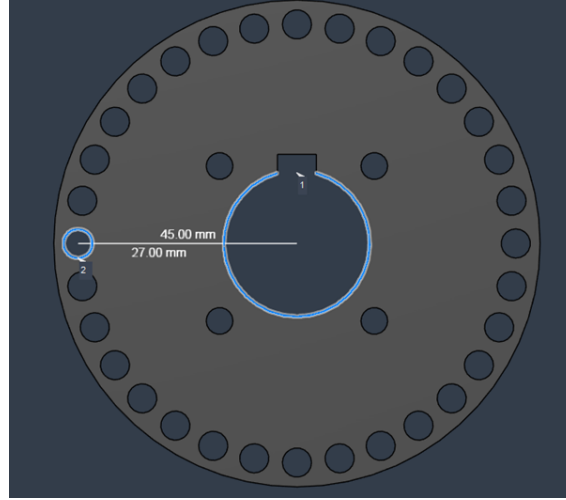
Picture showing distance between arm rotor center and pinholes in brake disc
